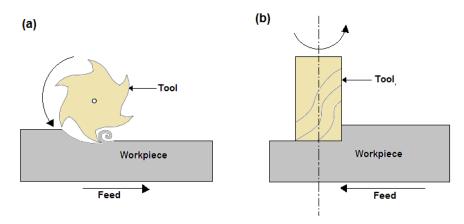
Milling classified into (a) peripheral (plain) milling and (b) face (end) milling. The arrows indicate spindle rotation and feed motion.
